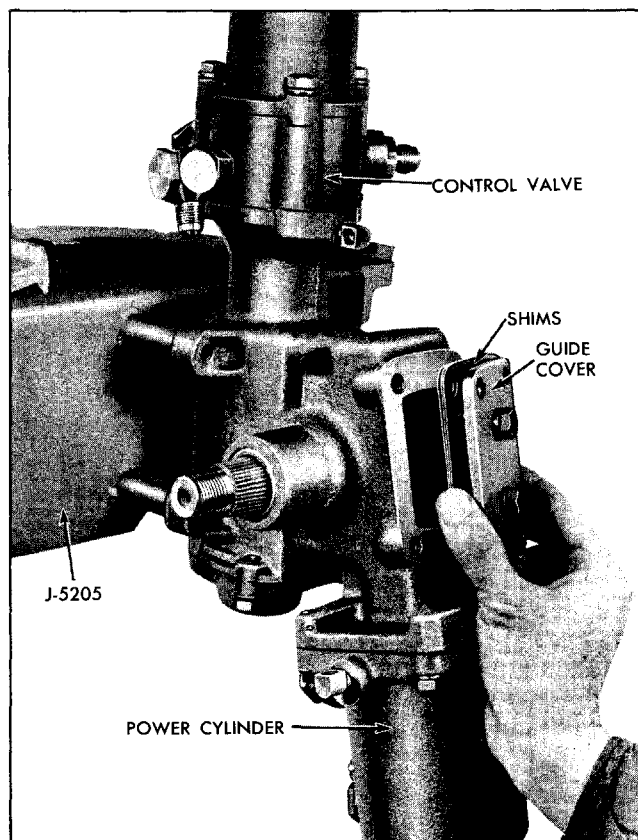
Steering Gear Mounted on Tool J-5205
